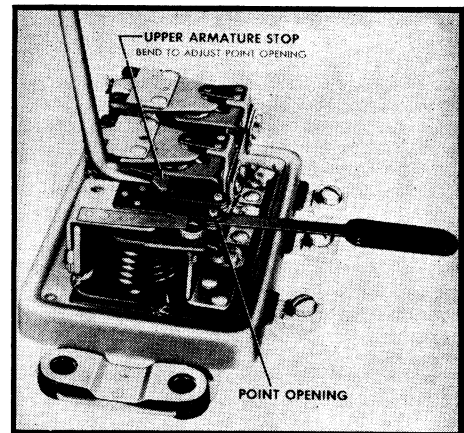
Checking and adjusting Delco-Remy circuit breaker point gap. If necessary, bend upper armature stop with tool shown
